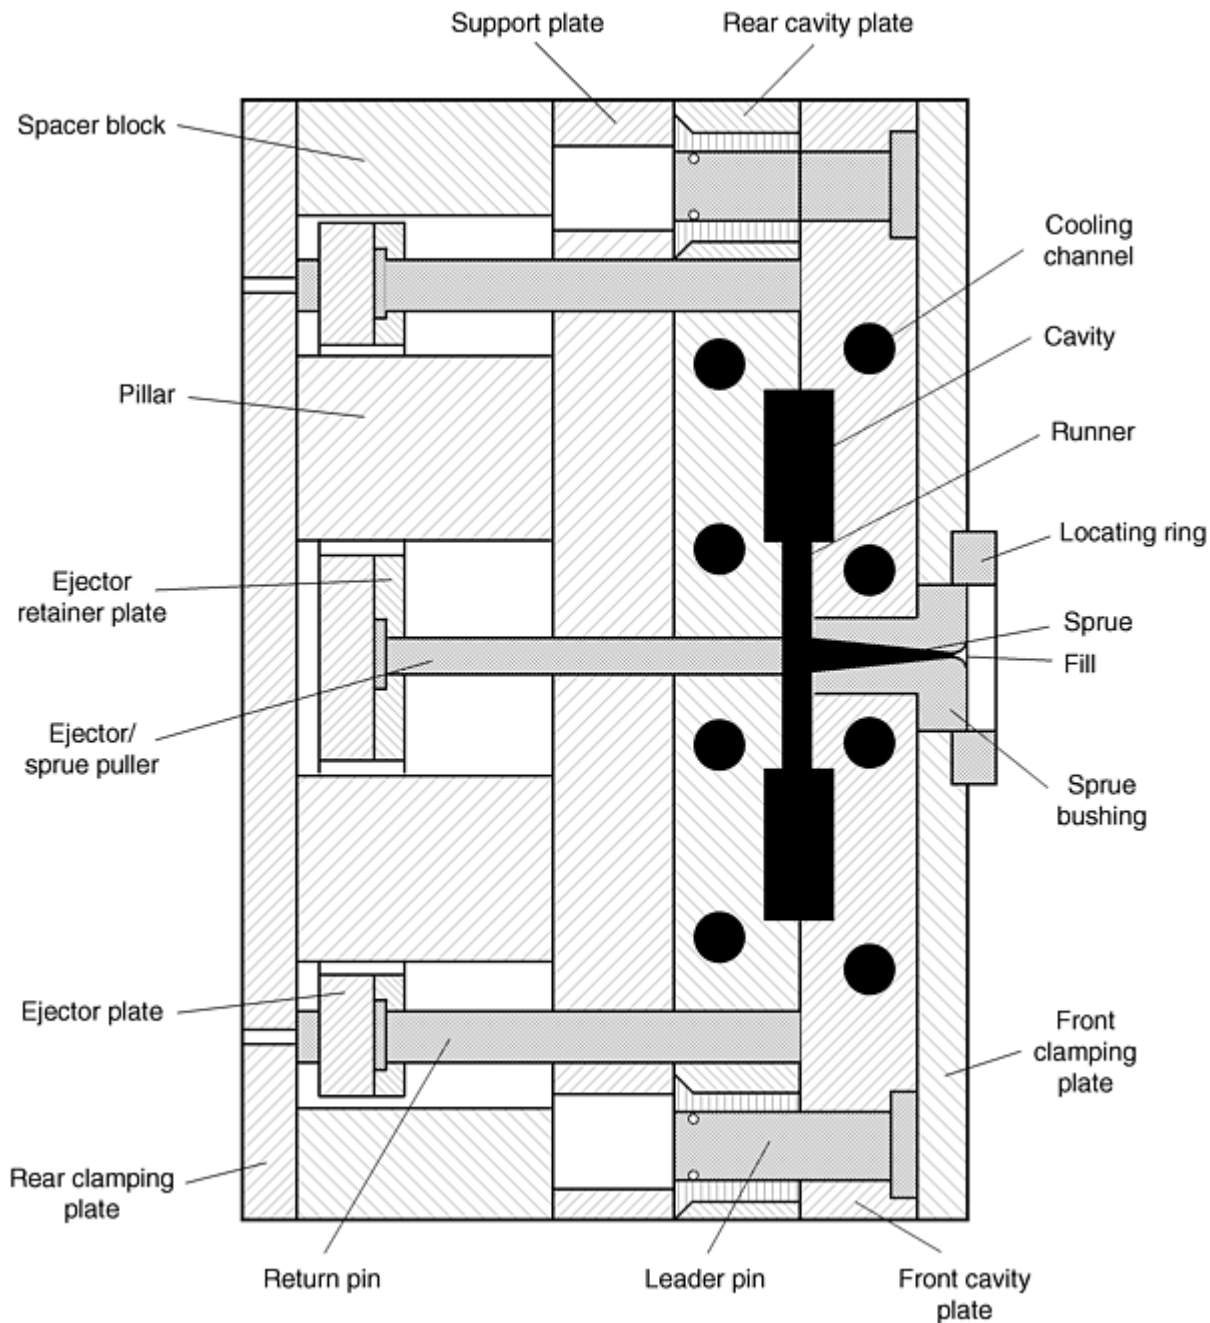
A sketch of the tool set for powder injection molding, showing major components
